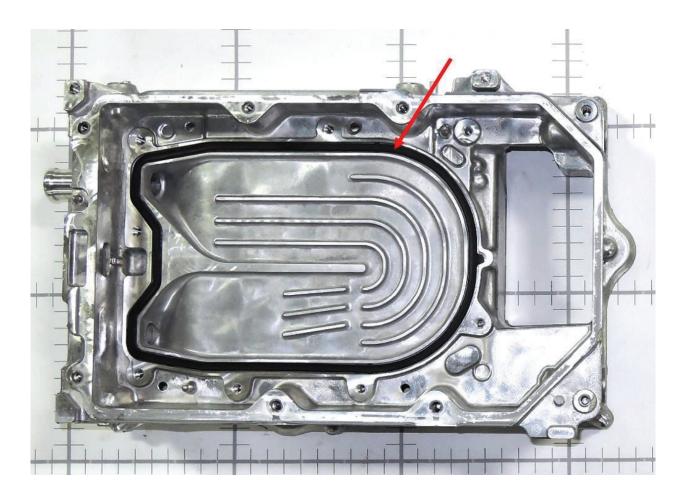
Toyota DC/DC Converter: Gasket in Place on Lower Enclosure
